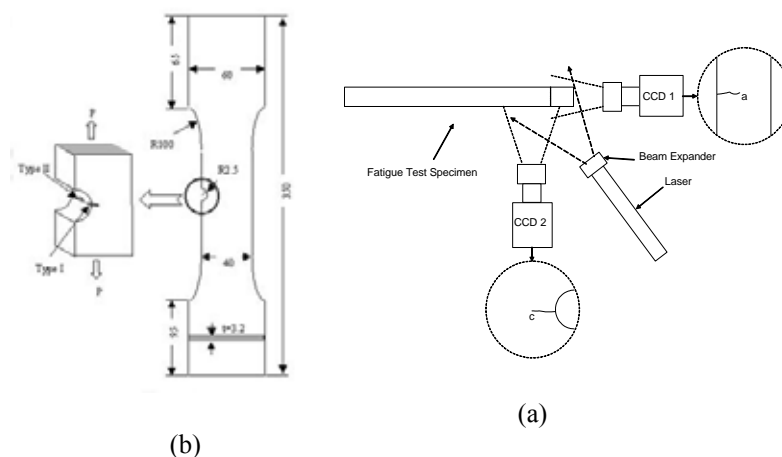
Fatigue test specimen and the arrangement to measure crack size.
